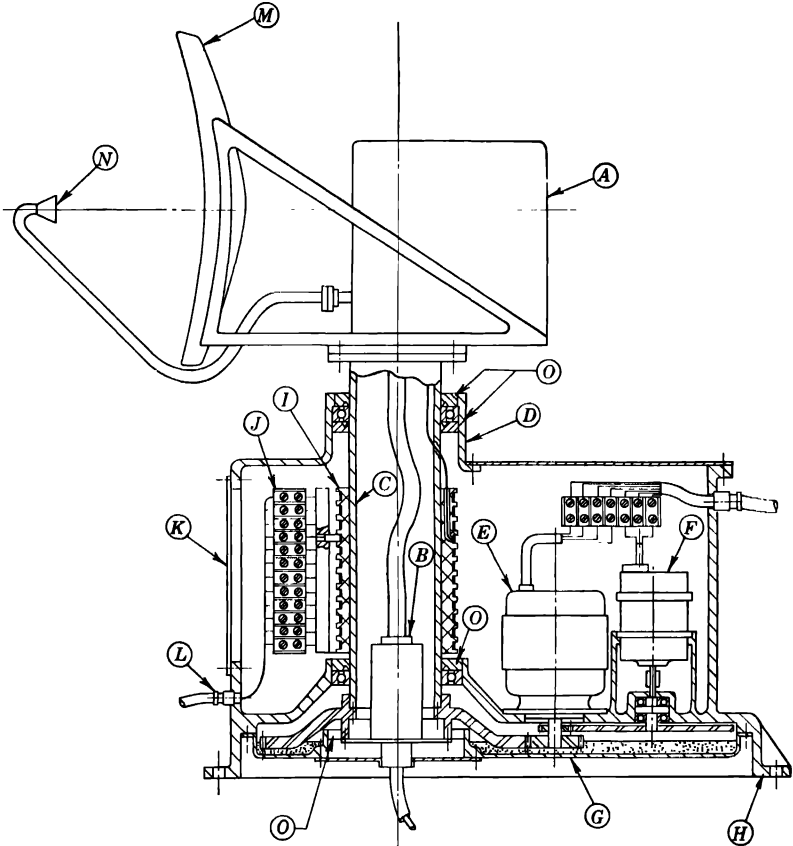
Schematic diagram of an antenna mount. *A*, R-f package; *B*, rotary joint; *C*, torque tube; *D*, azimuth housing; *E*, motor drive; *F*, synchro drive; *G*, gear case; *H*, footing; *I*, slip-ring assembly; *J*, brush terminal block; *K*, access door; *L*, stuffing gland; *M*, reflector and supports; *N*, antenna feed; *O*, oil seal.
